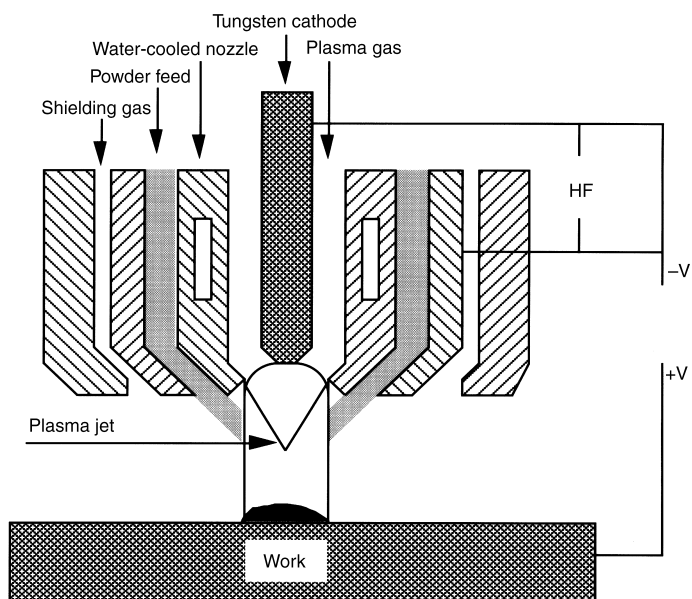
Plasma-transferred arc weld overlay process
